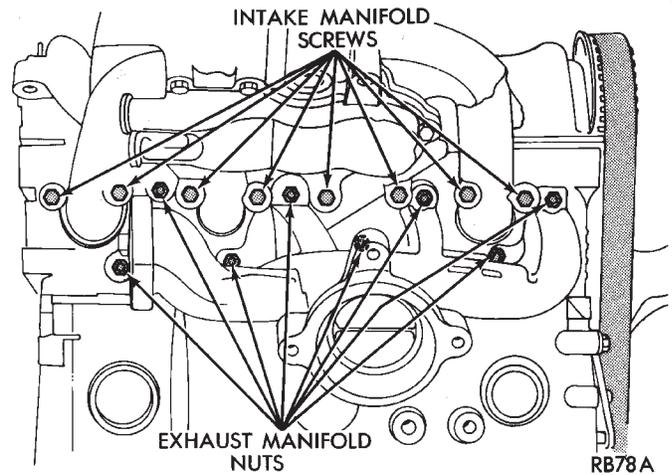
Intake and Exhaust Manifold Attaching Points—2.5L Engines
